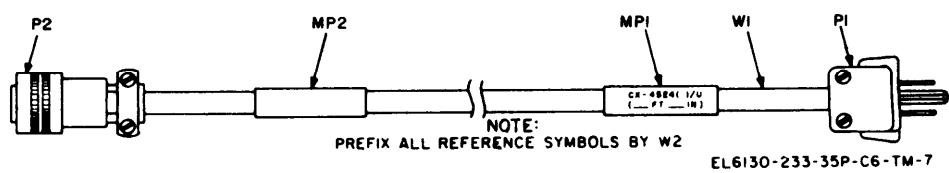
Cable Assembly, Power, Electrical CX-4524/U.
